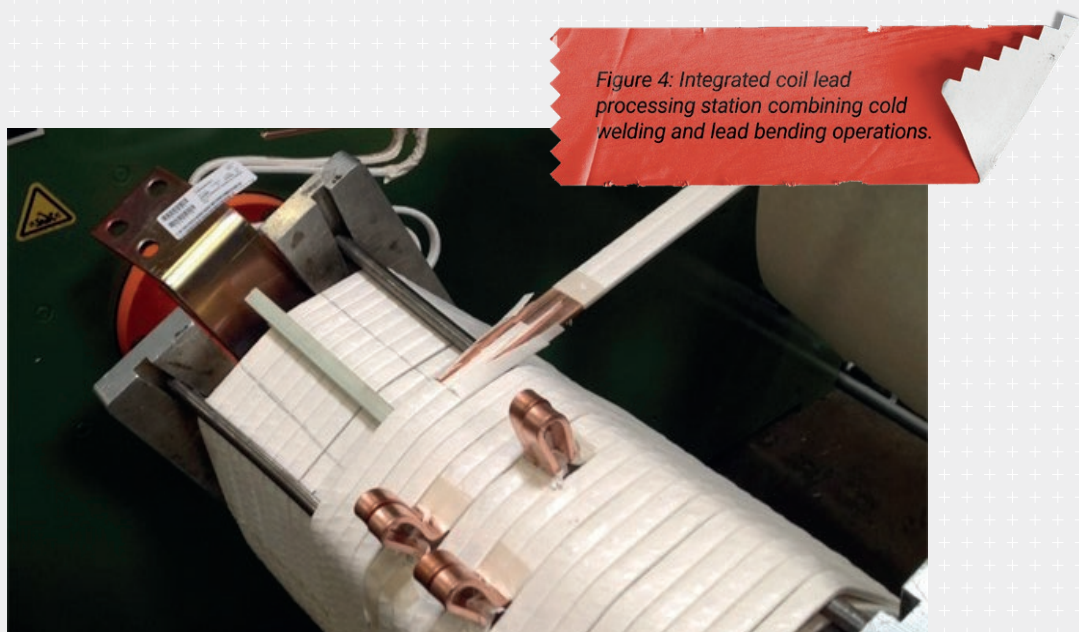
Integrated coil lead processing station combining cold welding and lead bending operations.
